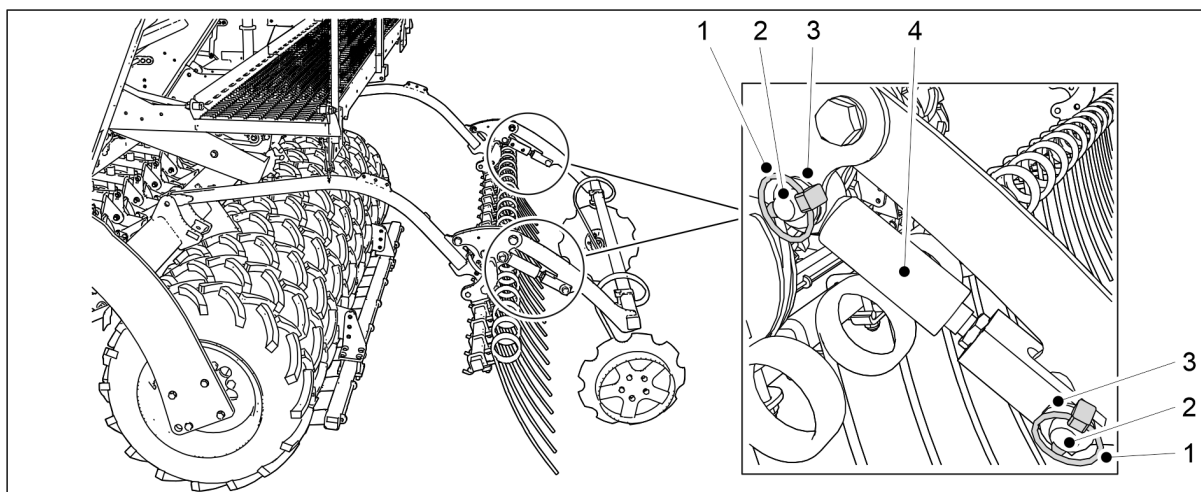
269. Removal of the rear marker cylinders.
